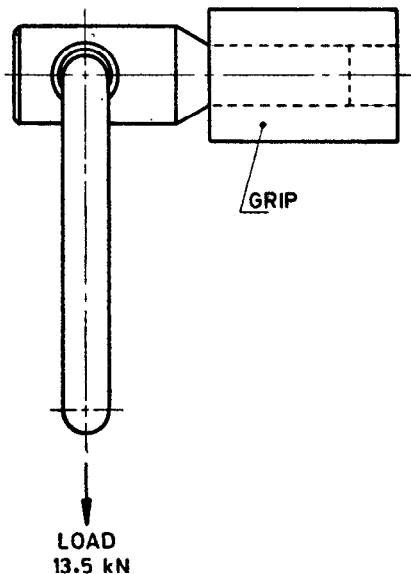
LOAD TEST FOR EXPANSION BOLT
